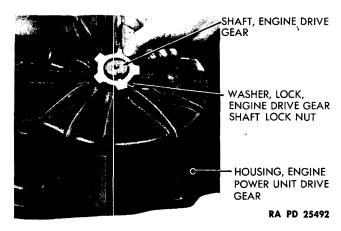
Installing Engine Drive Gear Shaft Lock Nut Lock Washer
